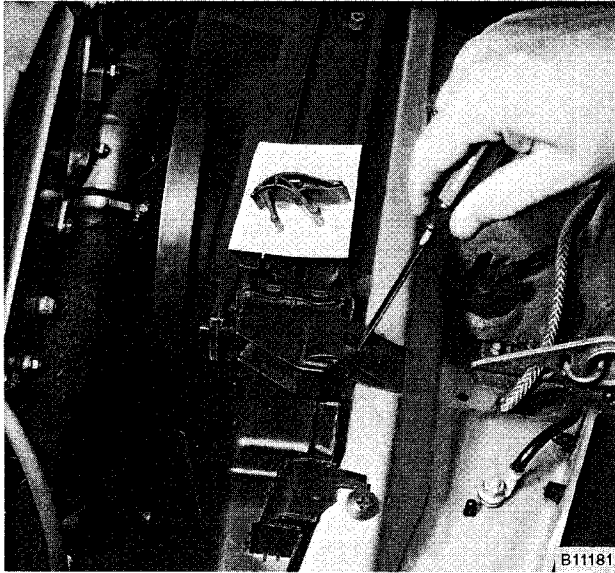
Radiator retaining clip being removed. Push down and pull screwdriver forward to release clip.
